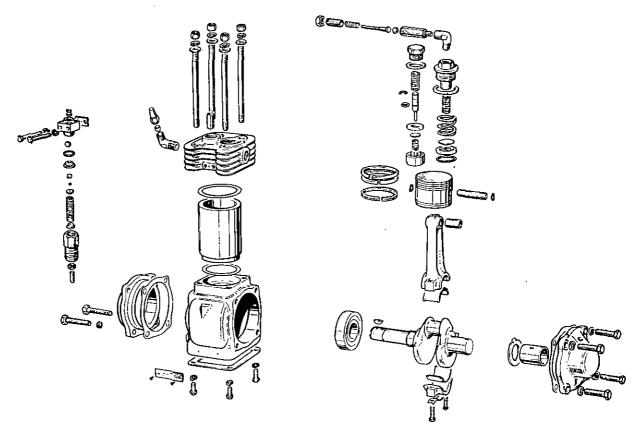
Exploded view of typical "S.C.4" Air Compressor.
